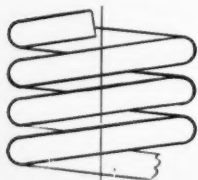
When the winding of a helical compression spring is completed, the wire is snapped or cut off, leaving the ends of the coils as illustrated herewith.
